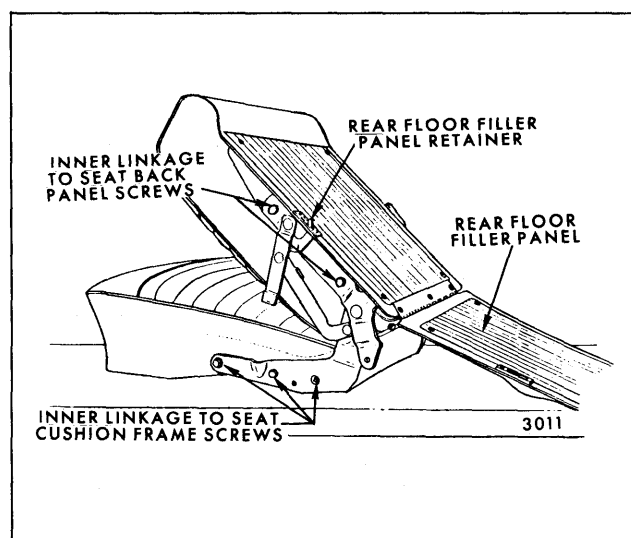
Folding Second Seat Cushion Assembly (Right or Left Side) - "65" Styles
